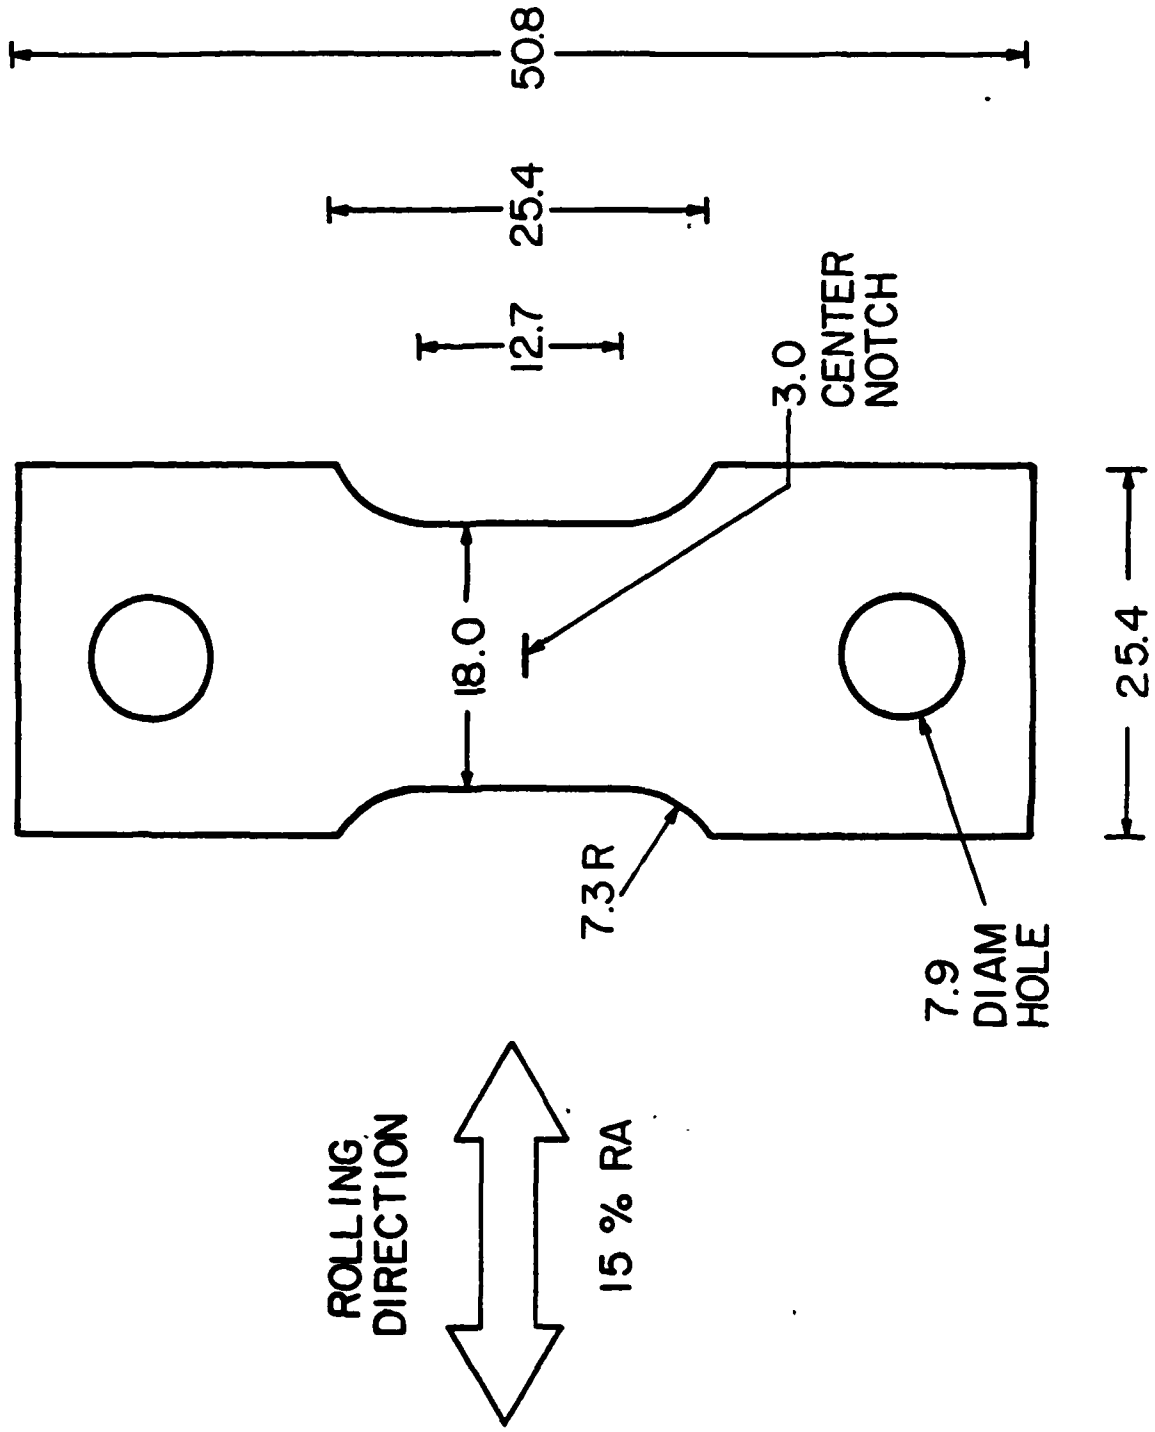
Center notched fatigue specimen. All dimensions are in mm. The thickness of the specimens is about 3 mm. 61
